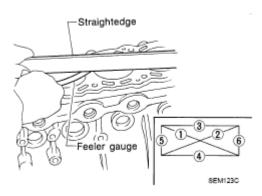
Checking Distortion Of Cylinder Block Upper Face Courtesy of NISSAN MOTOR CO., U.S.A.
